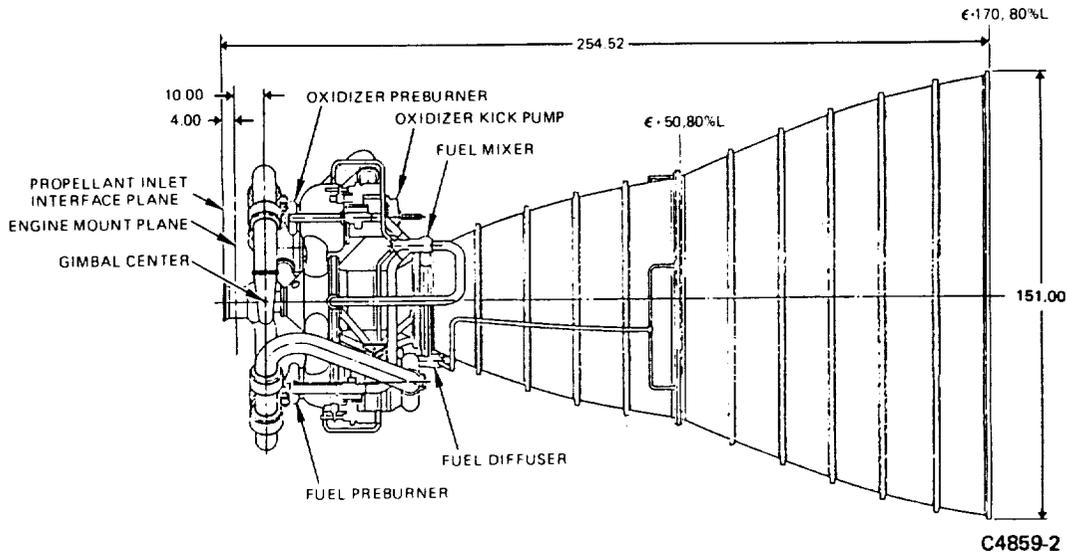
Dual Fuel-Rich Preburner Engine Layout, Side View
